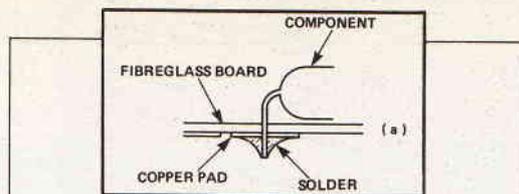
A conventional through-hole PCB. A leaded component is inserted through holes in the board and soldered to the copper track on the other side
